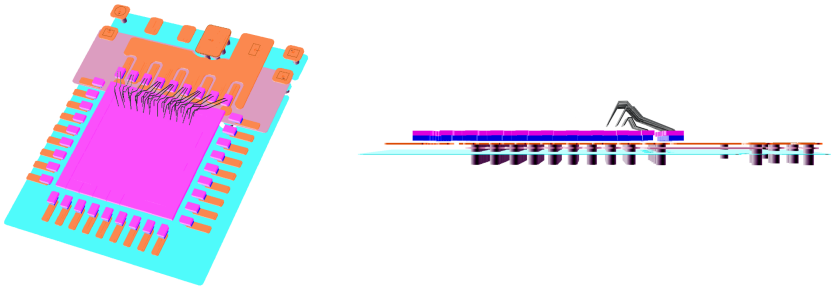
Corner view (left) and side angle view (right) of the PCB layout and bond wires used in ADS.
